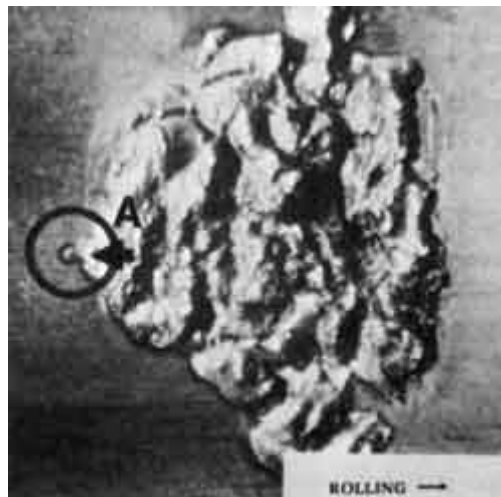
Photomicrograph of a bearing race where a single particle dented the surface (A), initiating pitting and spalling.
